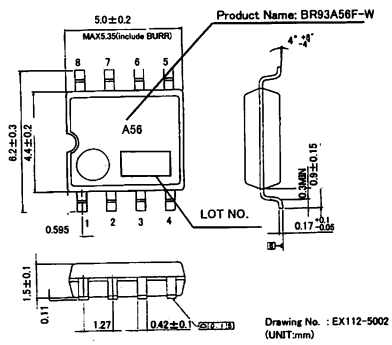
(a) PHYSICAL DIMENSION SOP8 (BR93A56F-W)
